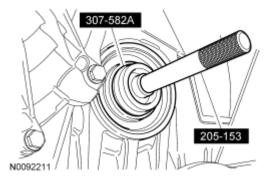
Installing LH Halfshaft Seal Courtesy of FORD MOTOR CO.
